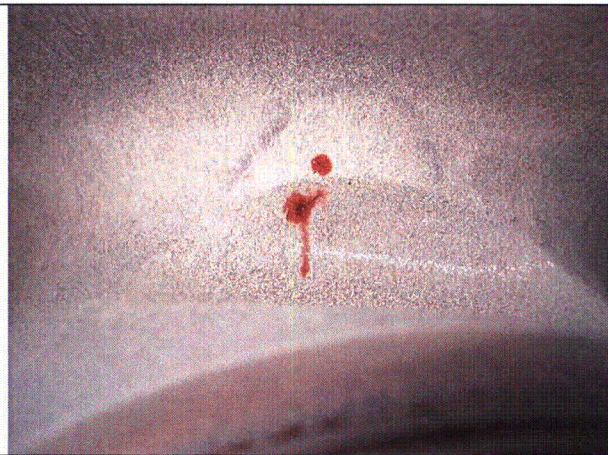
A photo showing the dye penetrant indications at the boat sample excavation site.
